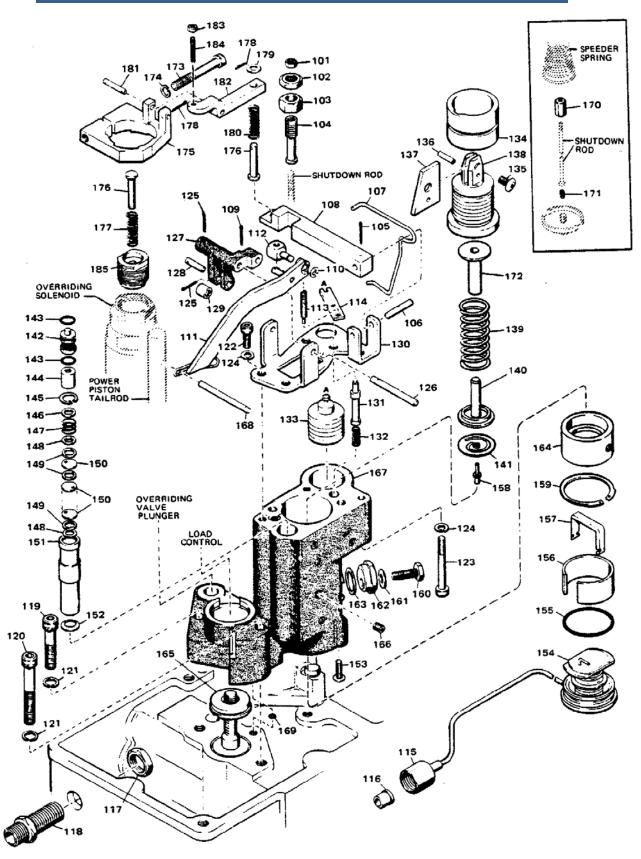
Exploded View of Fuel Limiter and Optional Load Control Override Linkage
